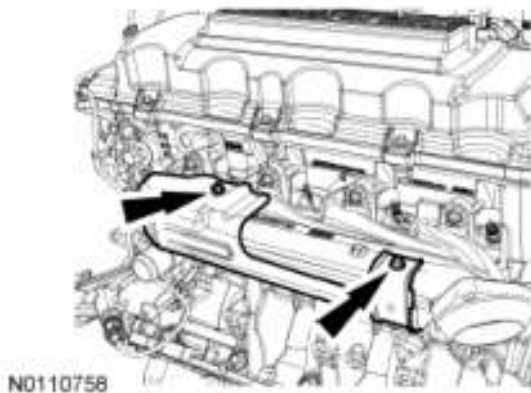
Locating Exhaust Manifold Heat Shield With Mounting Bolts
